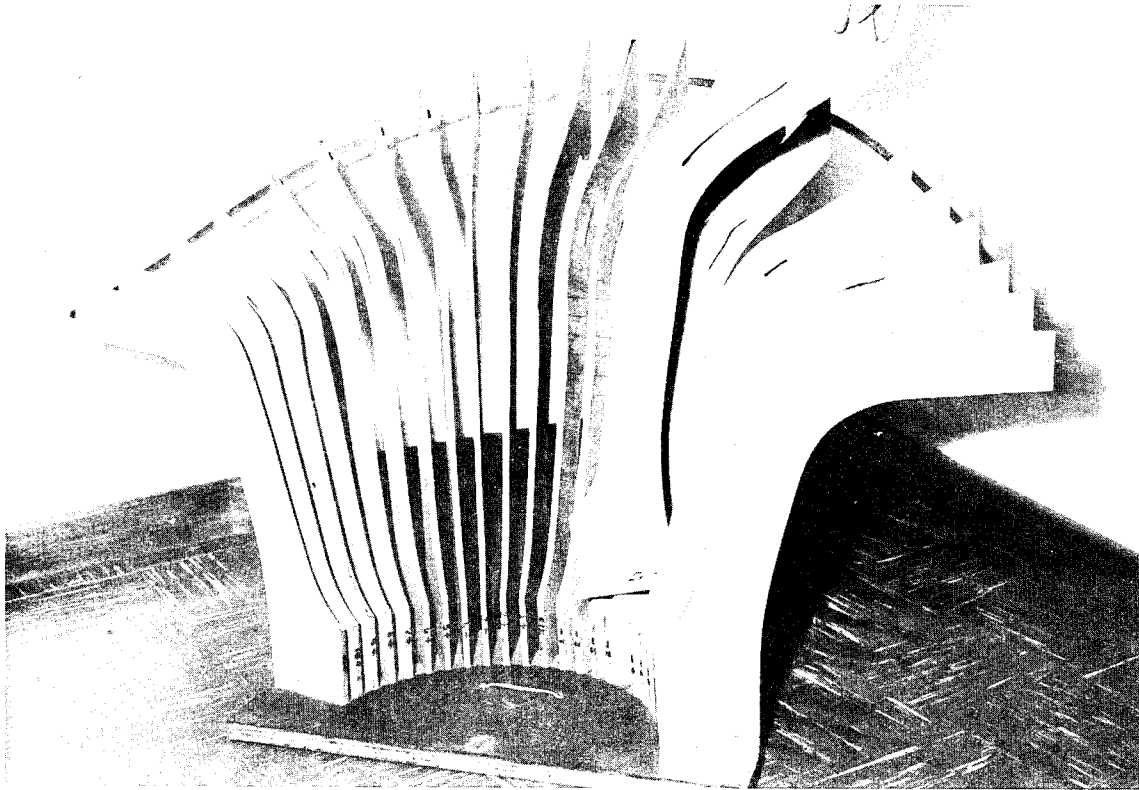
Wooden Cross-Section Model Slats of Pipe Connection to I. P. Turbine Casing
